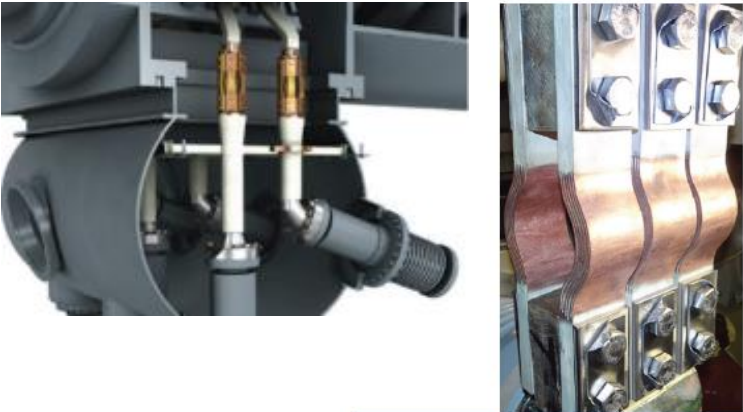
Complete flex connection replacement showing new, silver insulated copper leaves, new bolting plates, new bolts, and lock plates installed
